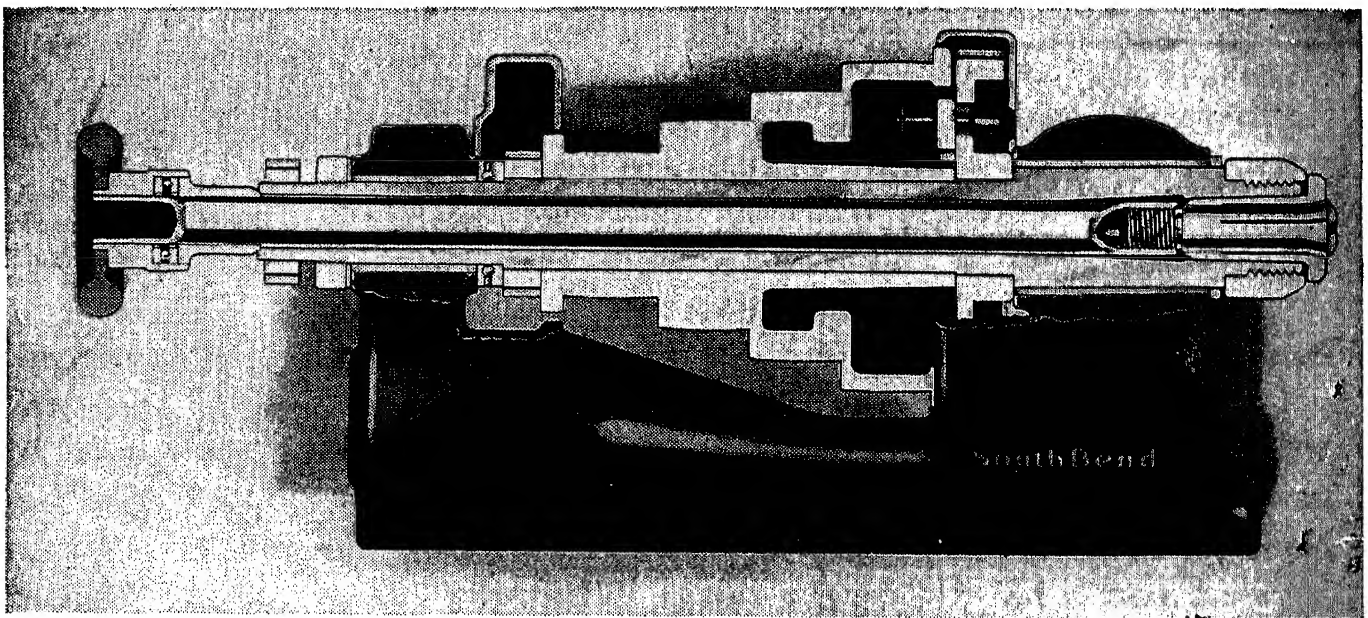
A cross-section of a lathe headstock showing the construction of a draw-in collet chuck. (Courtesy South Bend Lathe Works.)
